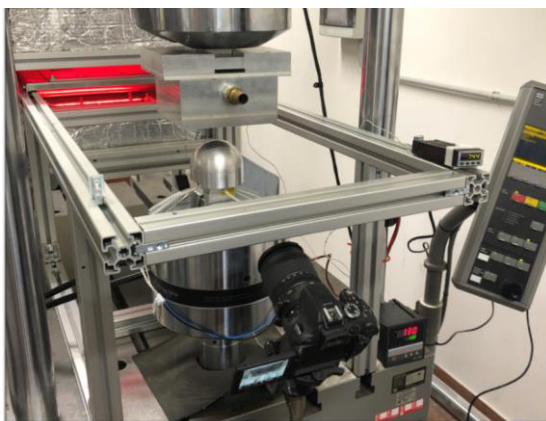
The machine and equipment used for performing laboratory tests on thermoforming of GF RTP.
